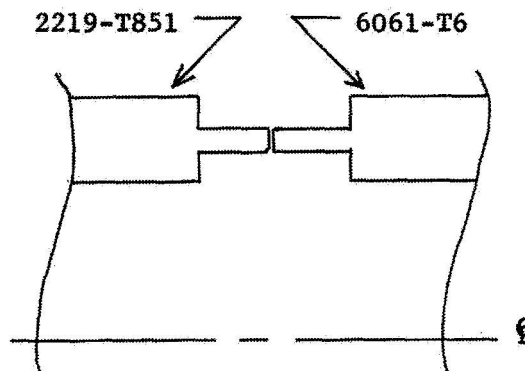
Inertia Welding 2219 to 6061 Aluminum for Preliminary Joints
